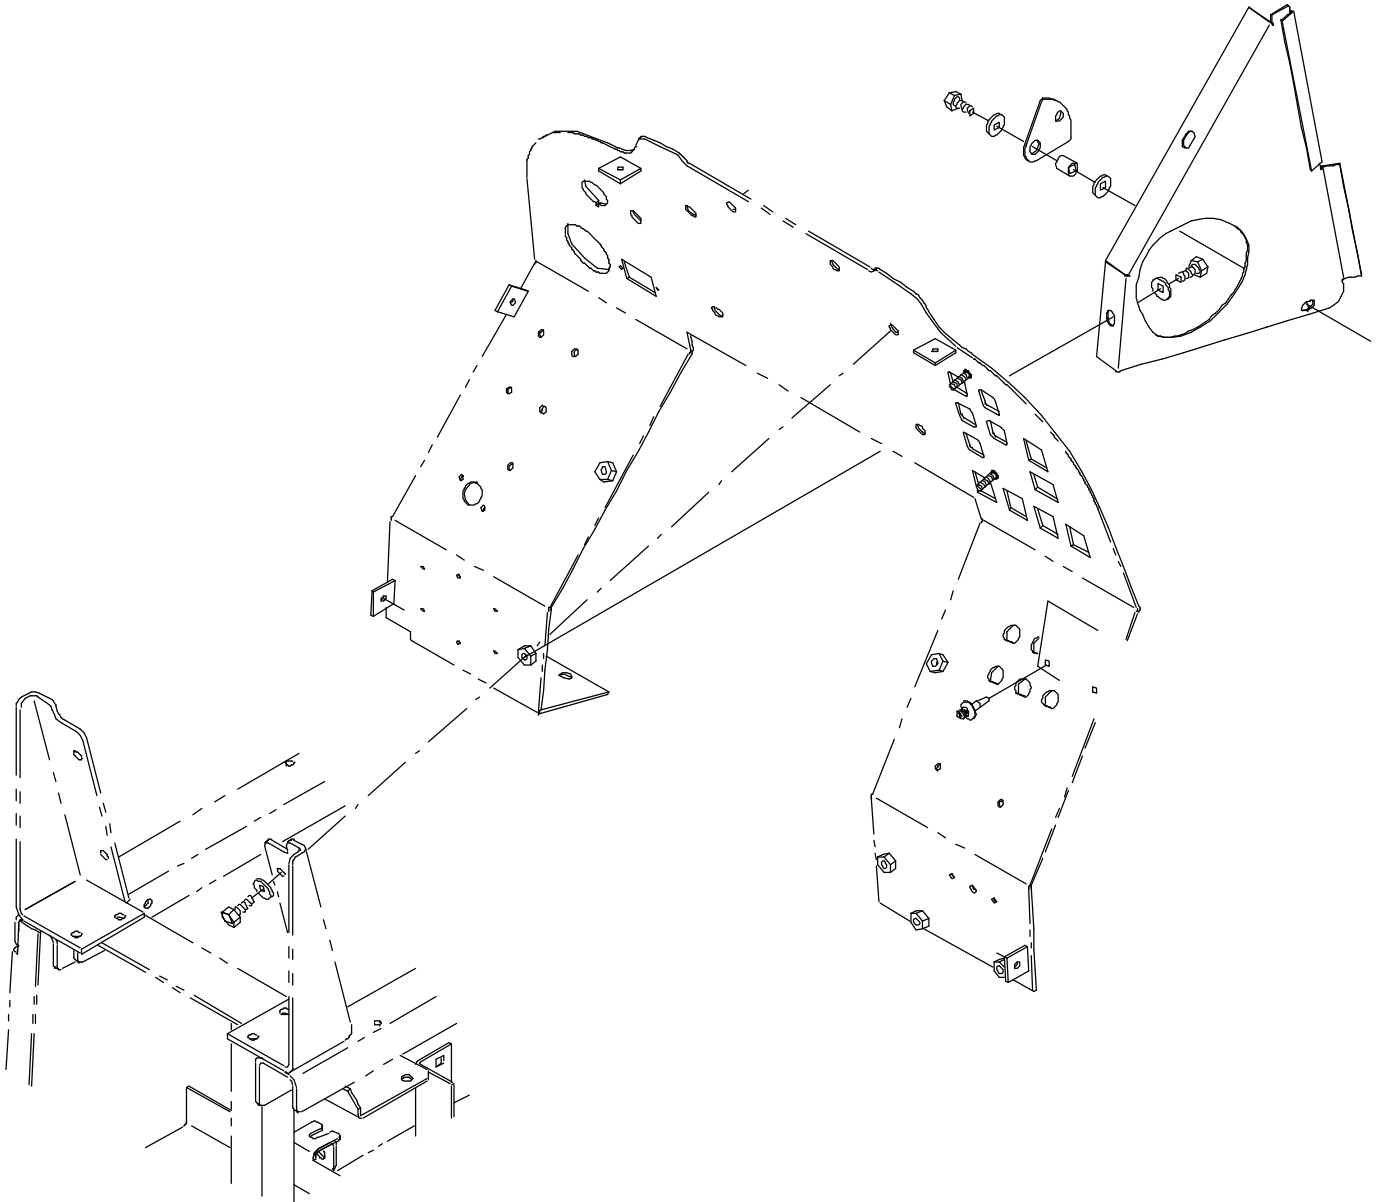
RIGHT HAND SIDE PANEL INSTALLATION
